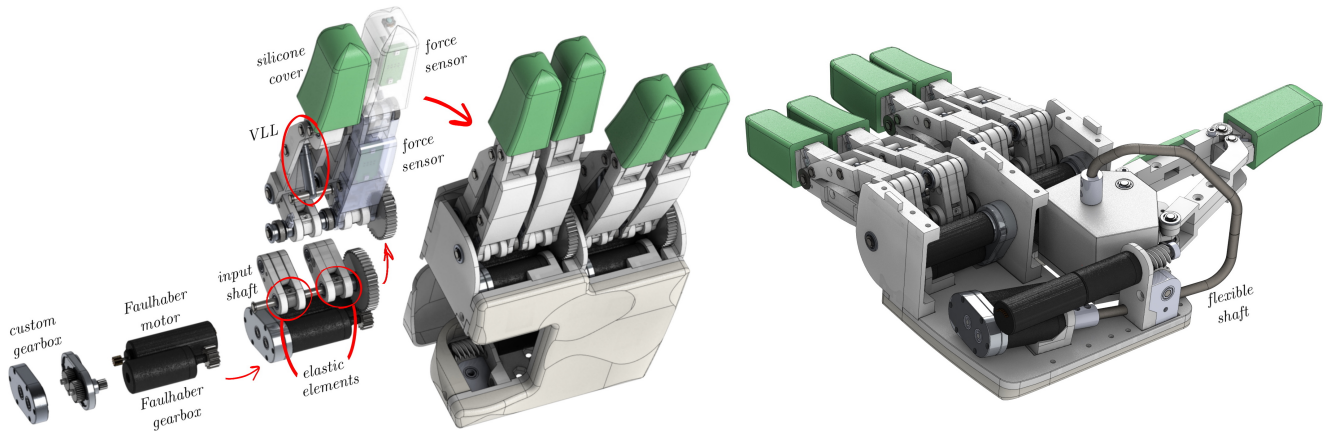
Exploded view render of the RUA Gripper to highlight the main design features
